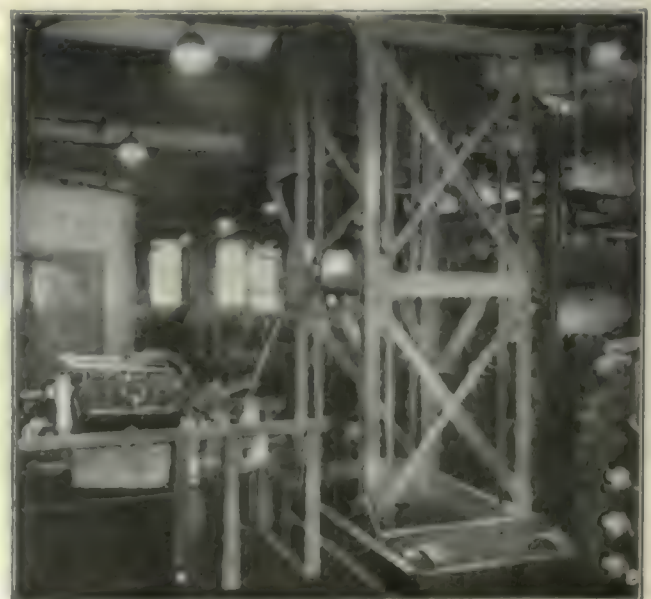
PUTTING TRANSMISSIONS ON MOTORS. FIG. 8—ELEVATOR FOR TIERING MOTORS
